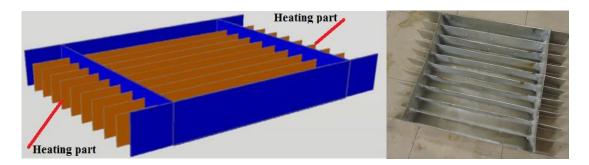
Aluminium fins inserted and welded to the storage.
